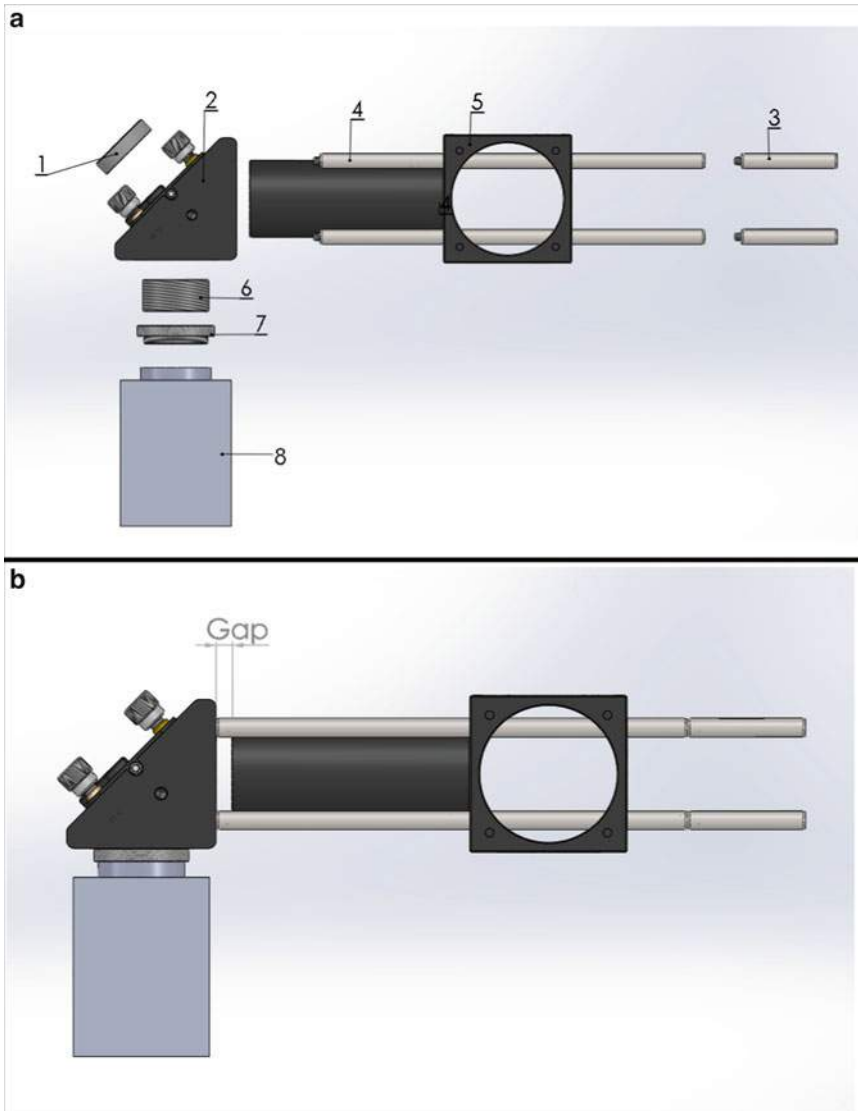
Attaching the camera and kinematic mirror mount. (a) Exploded view showing the relative locations of [1] the aluminum mirror, [2] the kinematic mirror mount, [3] the 1.5" cage rods, [4] the 6" cage rods, [5] the cage cube, [6] the SM1 coupler, [7] the c-mount to SM1 coupler, and [8] the camera. (b) The top view of the system assembled to this point showing the gap between the kinematic mirror mount and the lens tube
